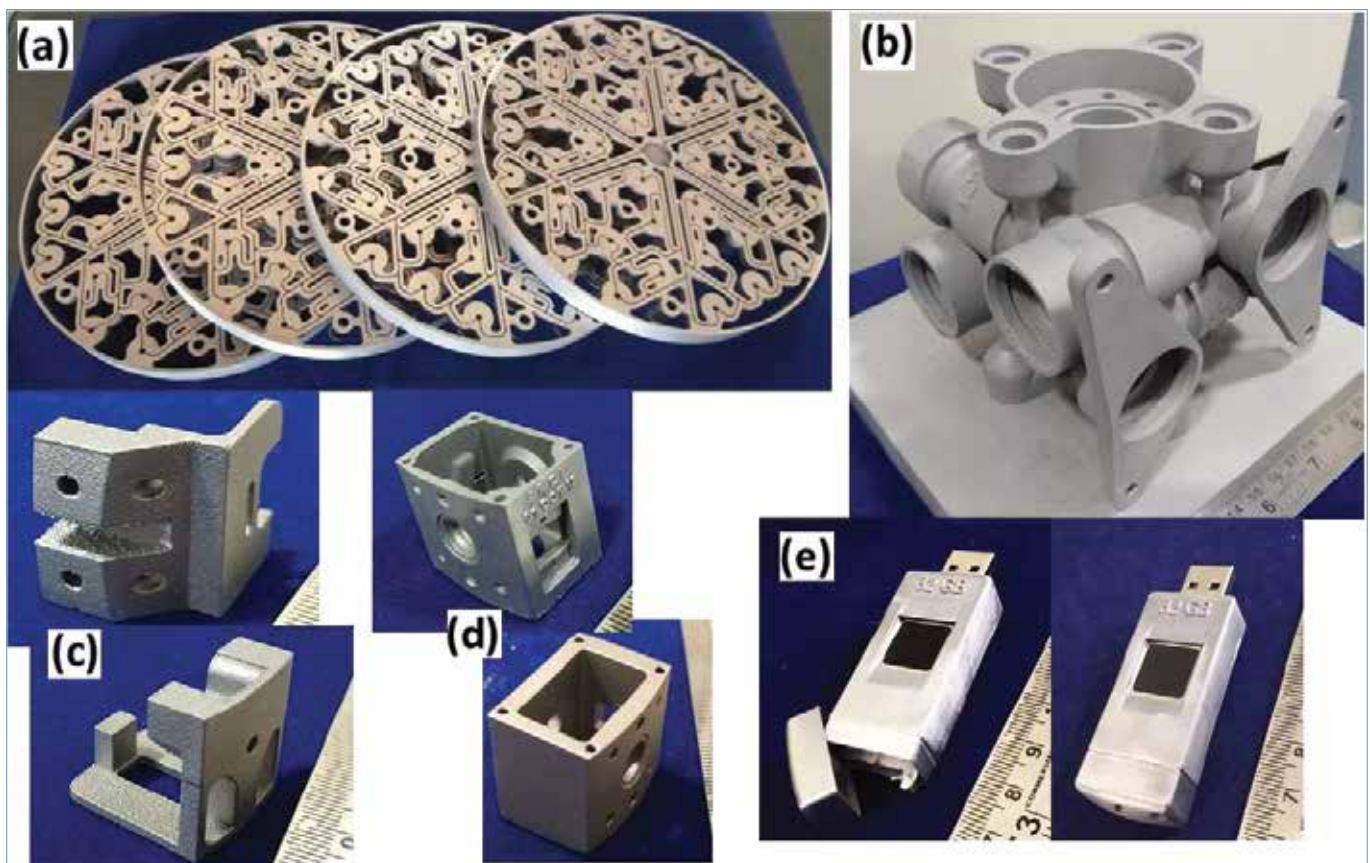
Photographs showing AM built AlSi10Mg components (a) Micro channel disc; (b) Valve Block; (c) Brackets; (d) Gear box and (e) Pen drive cover with dielectric coating
